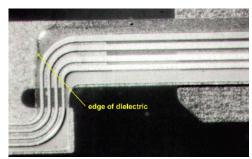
Disk drive head component with UVcure epoxy printed over 50µm wide gold leads.
